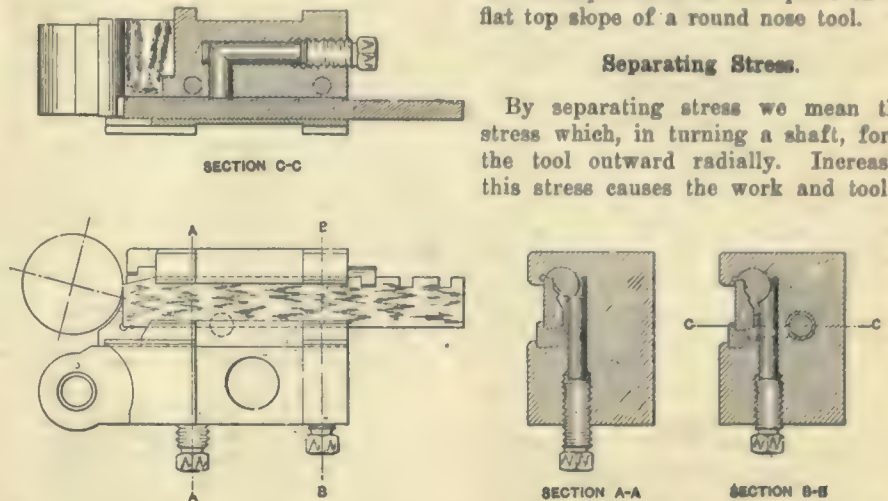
Details of Turning Tool Showing Means of Holding Cutter and Limiting Oscillation.
